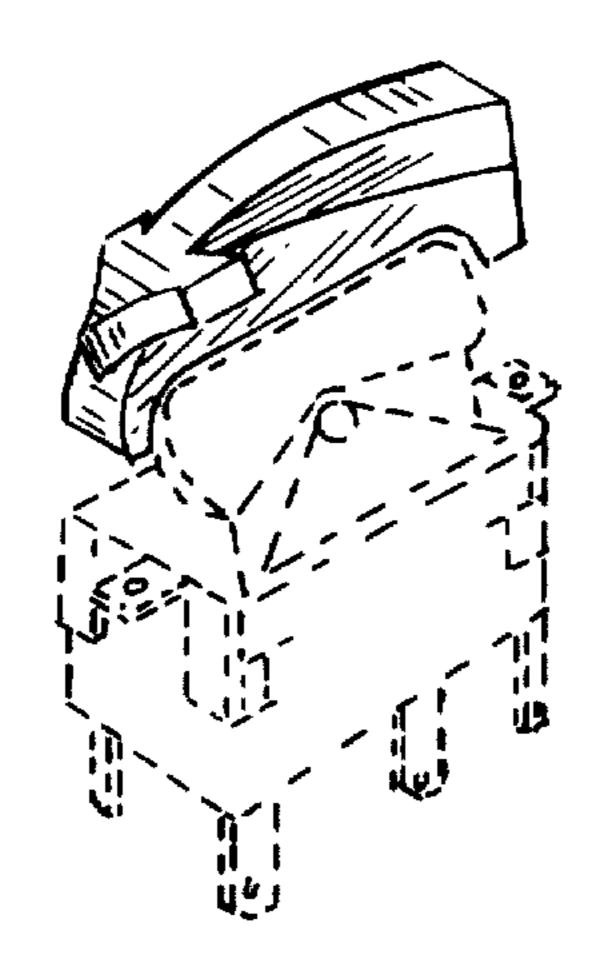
is a front elevational view of the switch key on a greatly enlarged scale;
